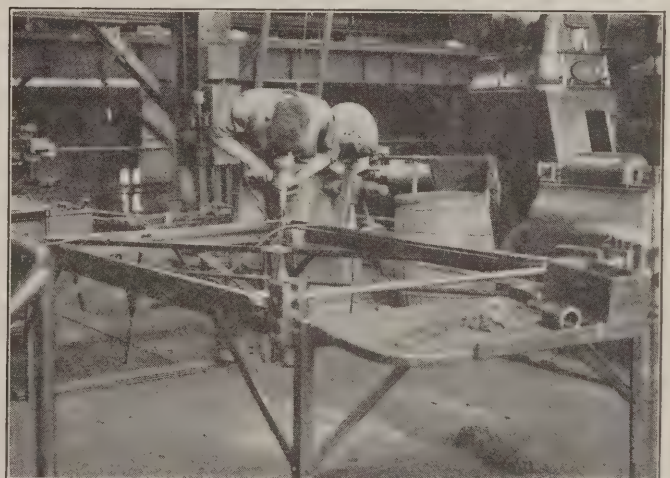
Special Fixture Used for Assembling Pantograph Top Frames to Insure Proper Operation When Installed
